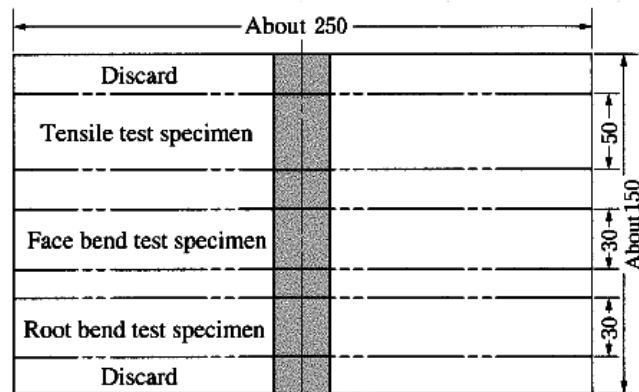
Butt Weld Test Assembly for Electrode for Manual Arc Welding, Consumables *MIG* and *TIG* Welding Consumables and Flux Wire for Semi-automatic Welding (Unit: *mm*)
